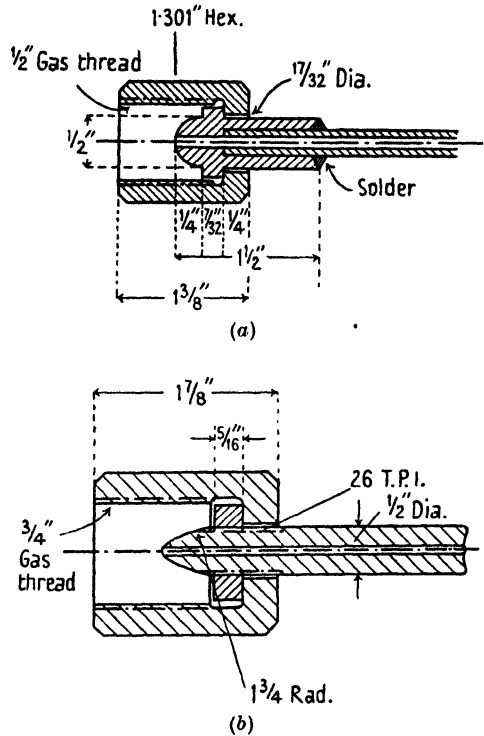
(a) Brass connector for copper pipe-line. (b) Steel connector.
